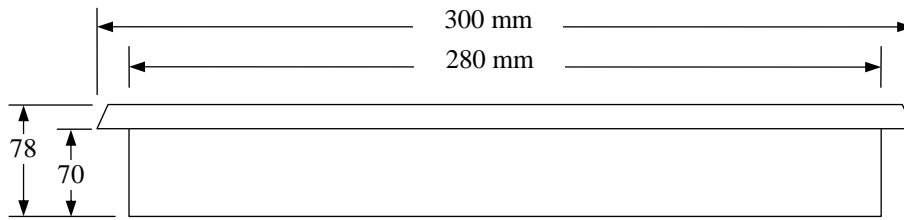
Dimension for HUST H2N Controller Box (Top View)
